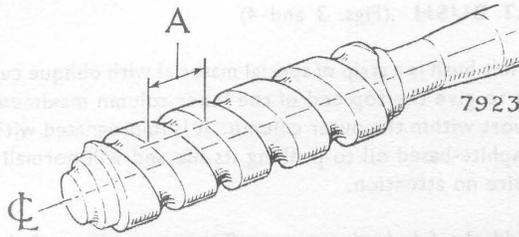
The worm cam end of the inner column showing method of determining the steering ratio. Measure the lead "A" parallel to worm gear centre line.
